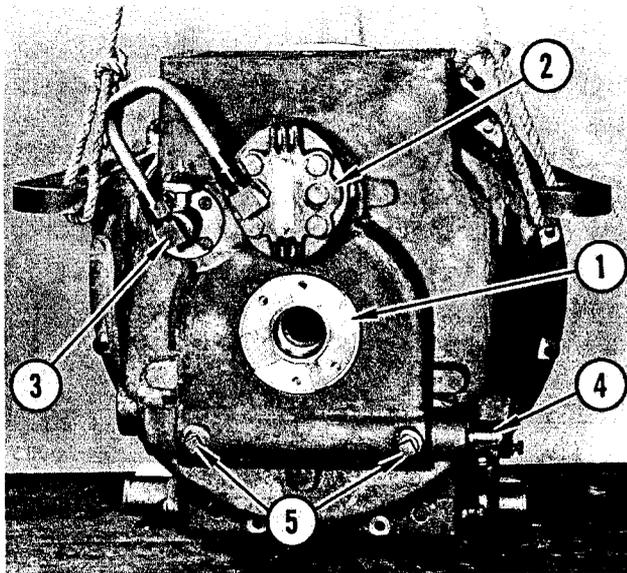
FRONT VIEW OF HOUSING ASSEMBLY
